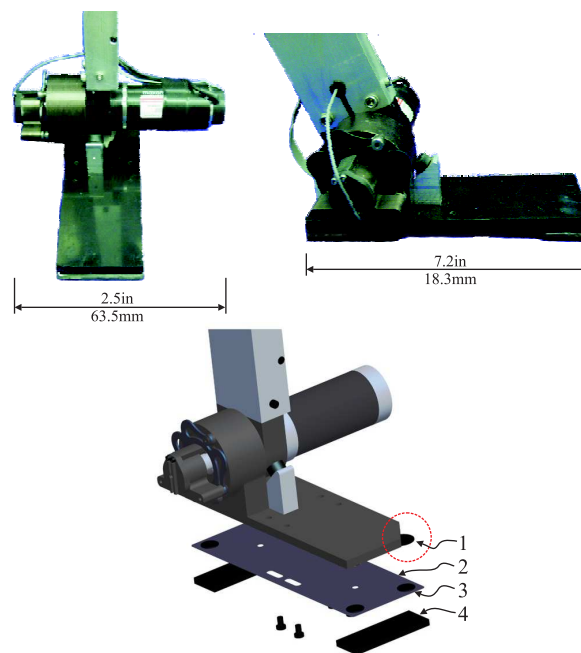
Top: Foot of the robot. Bottom: CAD model - exploded view of the foot: 1) FSR sensor; 2) foot-plate; 3) sensor touch-pad; 4) rubber foot contact-pad.
